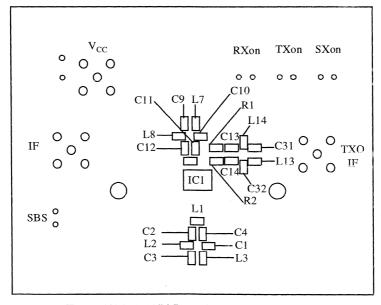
UAA2073XM Demo board - Layer 1 Assembly
